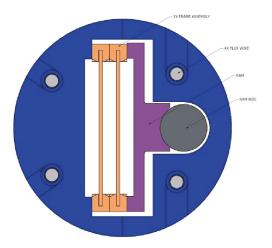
AFIP-1 through -3 Frame Assemblies in Holder Assembly
